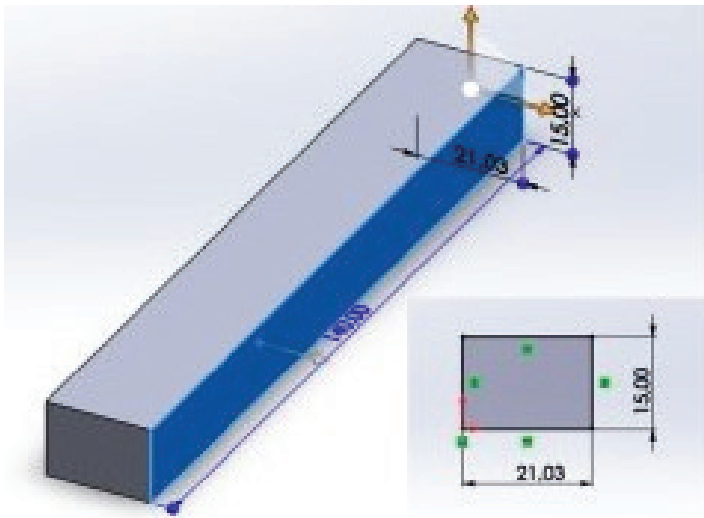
Rectangular cross-section test specimen rod specification for bending test
